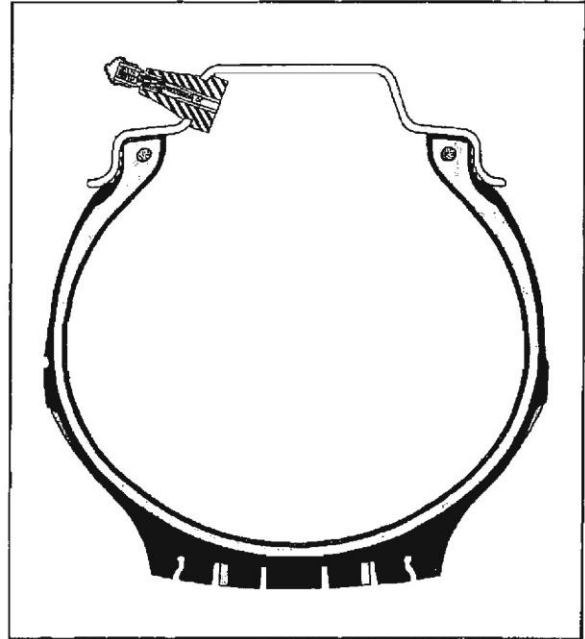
A-3 Cross Section of Typical Tubeless Tire
